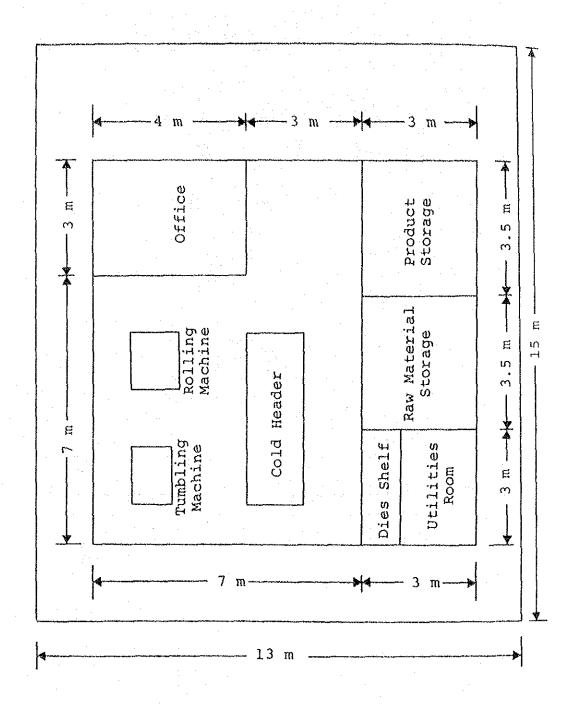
LAYOUT OF CROSS-RECESSED HEAD MACHINE SCREW AND COLD HEADED RIVETS SHOP
